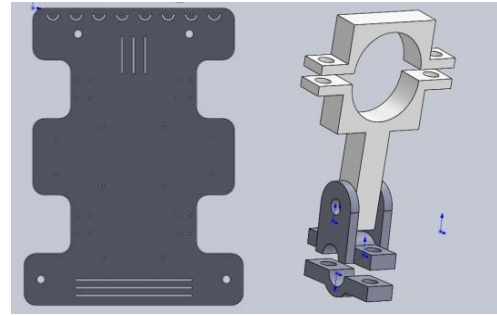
(a) The chassis and (b) the ultrasonic clamp
